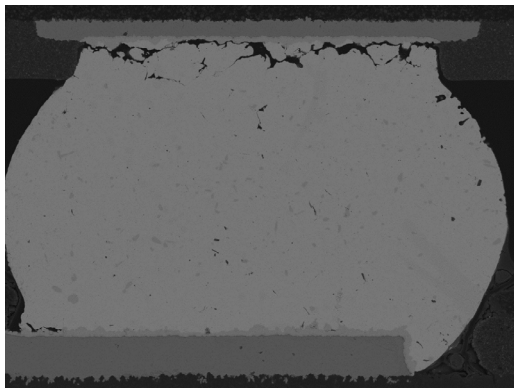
Cross-section image of a solder joint failed during board level temperature cycling (No lid, SA-3)
